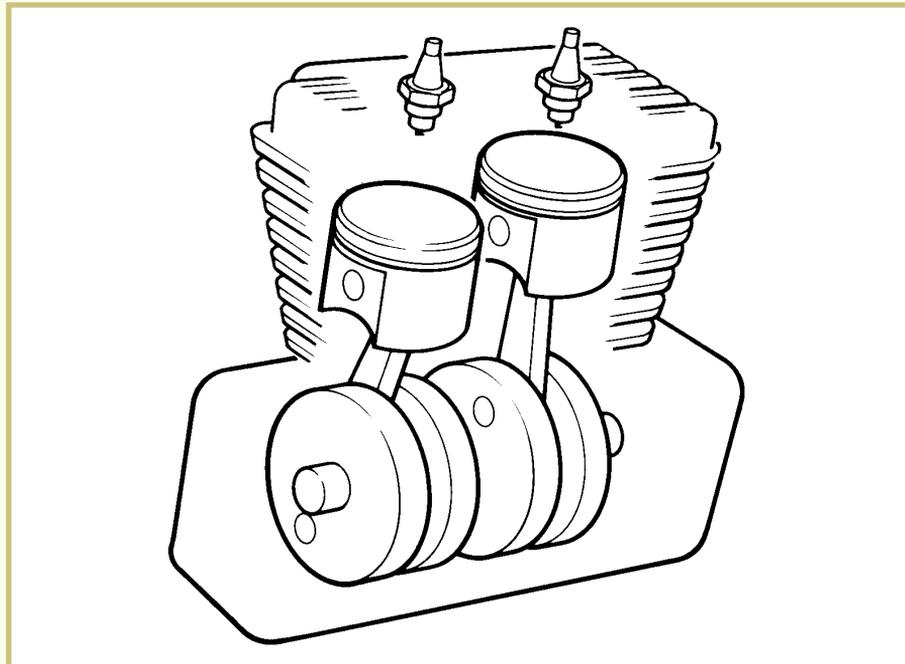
A 180-degree crankshaft design has one piston at TDC while the other piston is at BDC as illustrated here.
